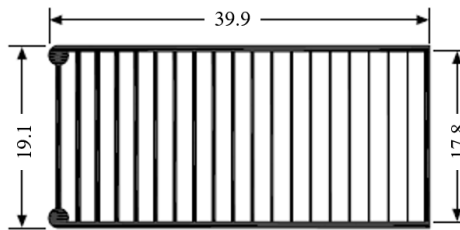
Dimension of crack gauges of TK-09-CPC03-003/DP
